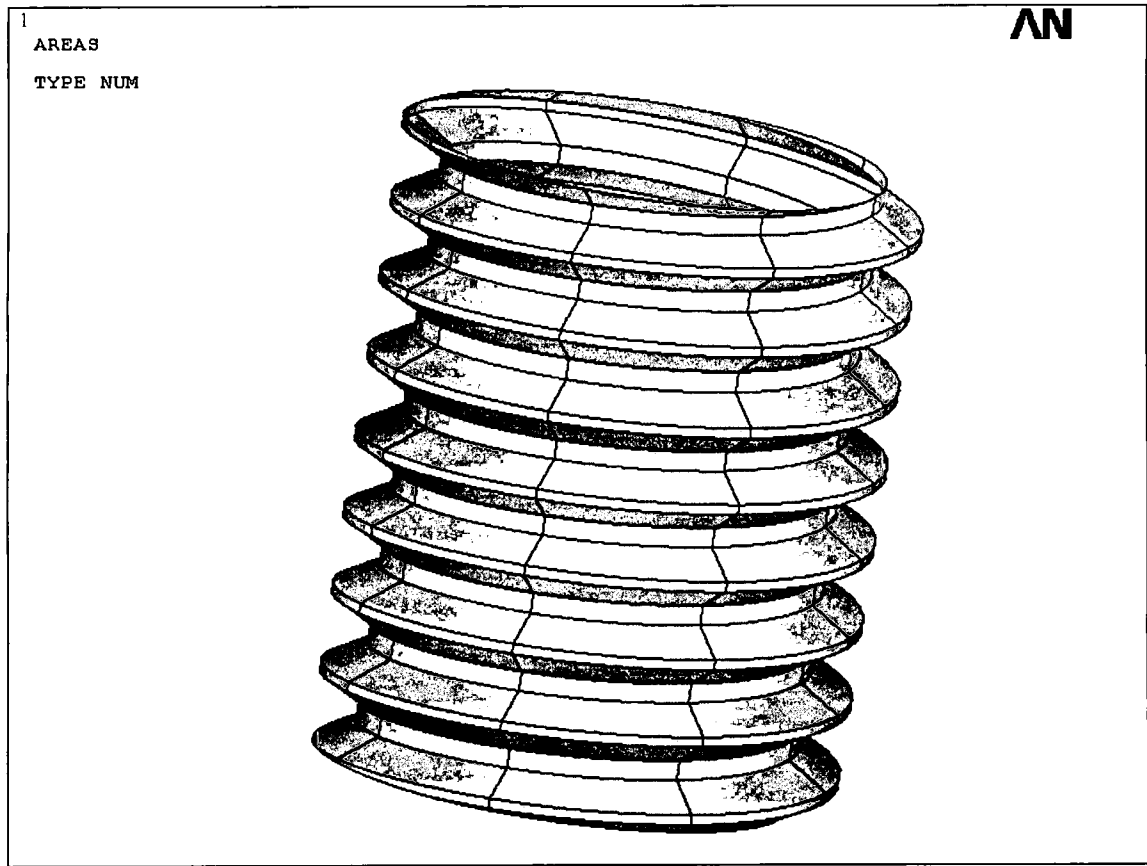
ANSYS surface image of the internal threads after copying and slicing at the top and bottom.
